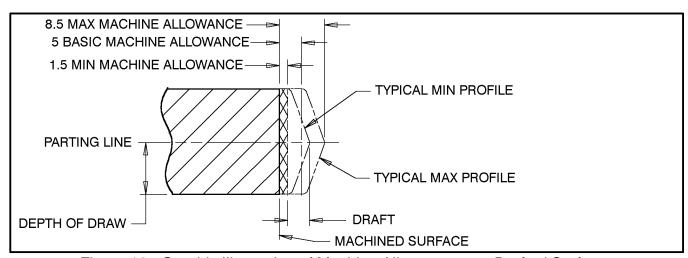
Graphic Illustration of Machine Allowance on a Drafted Surface
